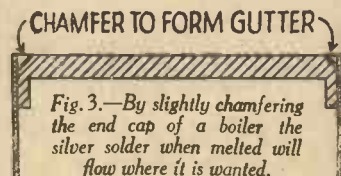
By slightly chamfering the end cap of a boiler the silver solder when melted will flow where it is wanted.
